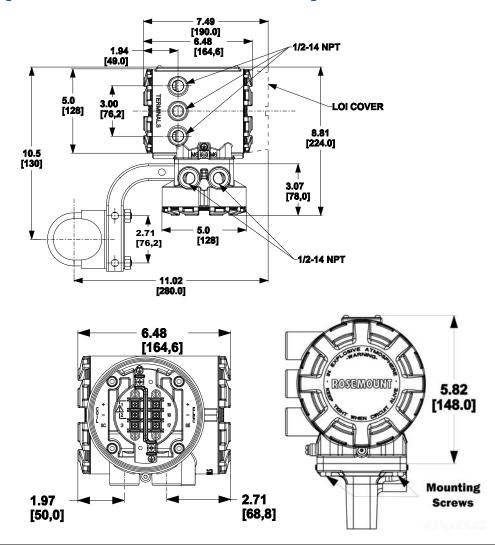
Rosemount 8732EM Dimensional Drawing
